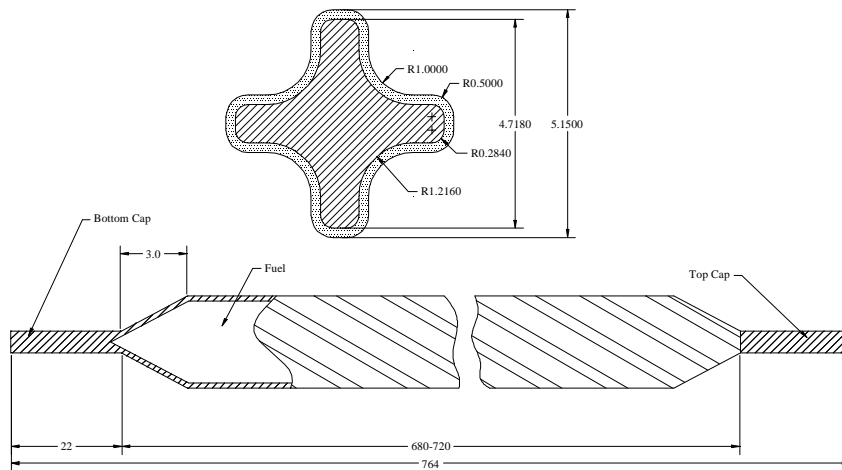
Spiral Cross-Shaped Fuel Rod (dimensions given in mm)
